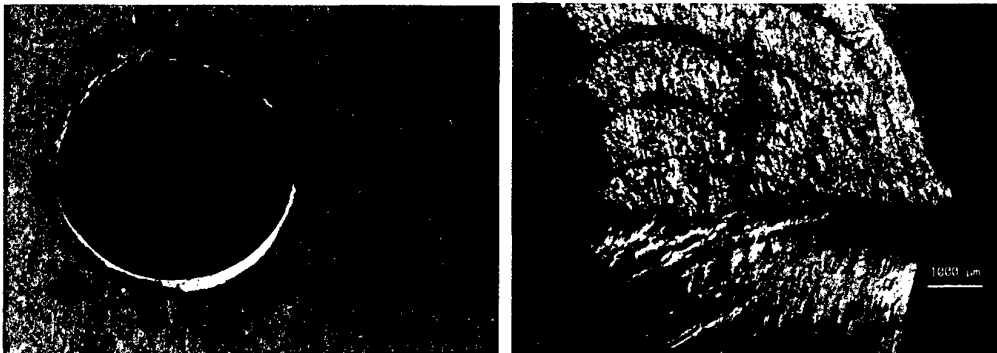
View of the top of the lower skin in the wing, showing the out-of-round hole and the large crack. The thin circular outline represents a fastener in the hole. The right image shows an Oblique view of the broken open hole. Note the well defined tear bands associated with the CPLT loads
